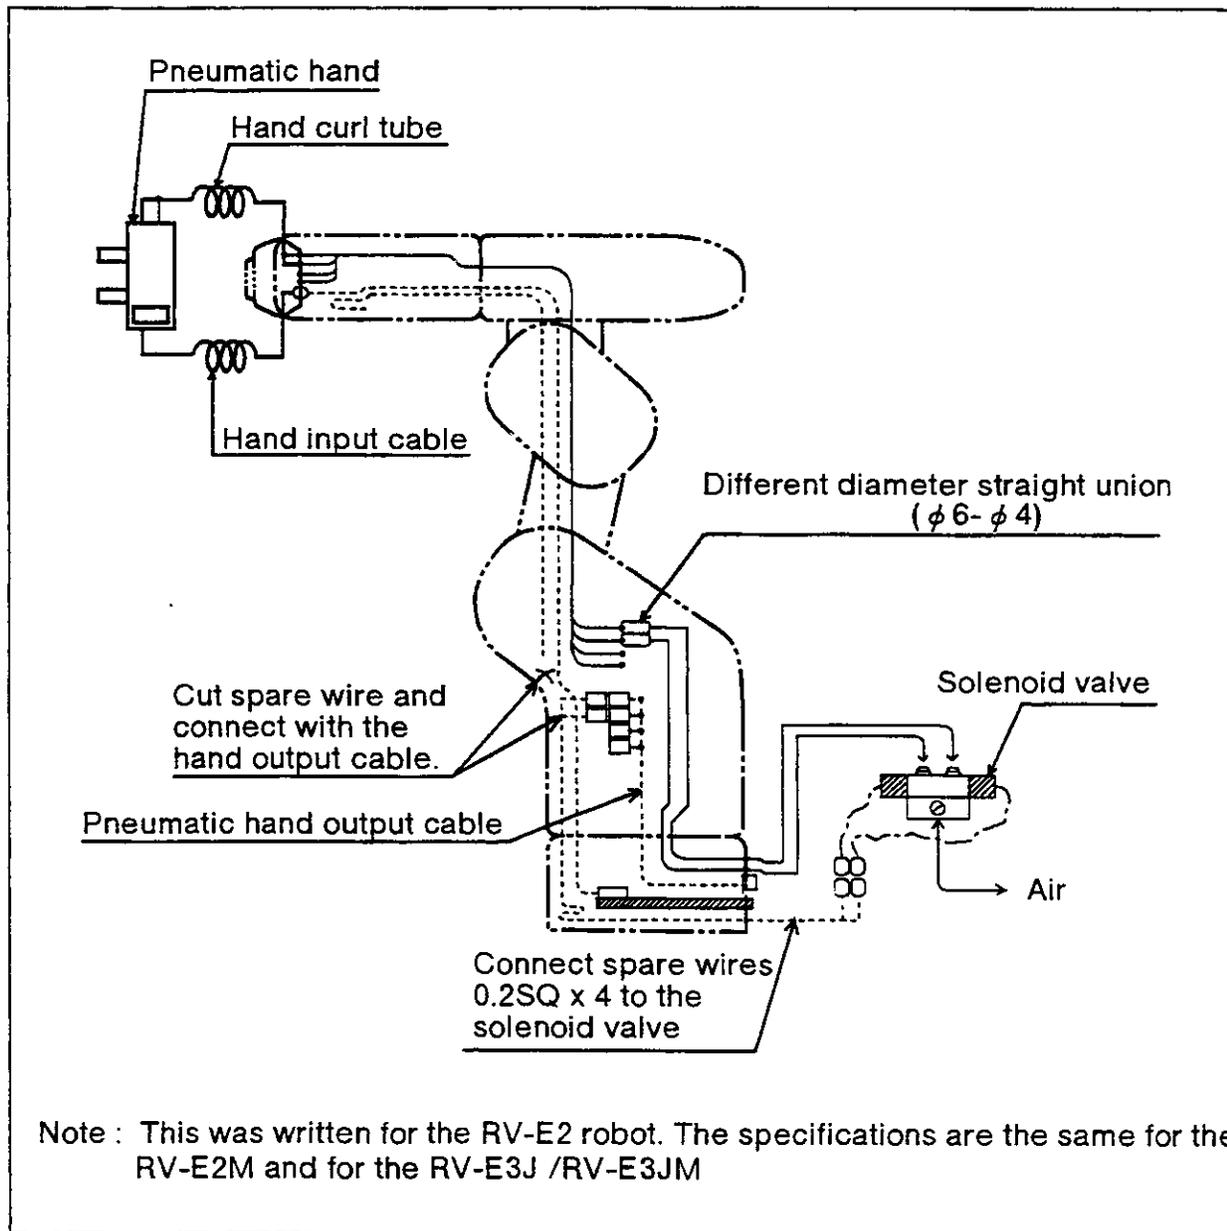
Method of installing a solenoid valve externally (Using hand I/O for control)
